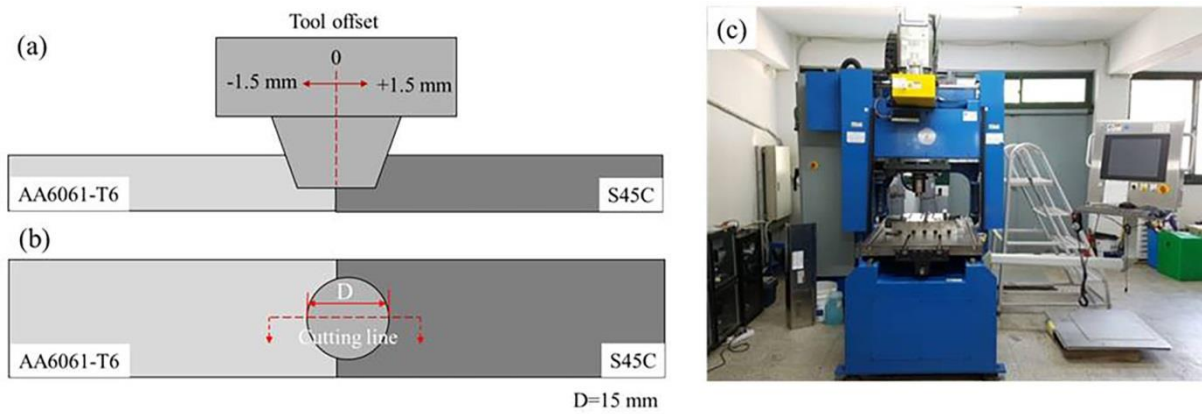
Schematics of specimen configuration: (a) side and (b) top views; (c) FSSW machine
